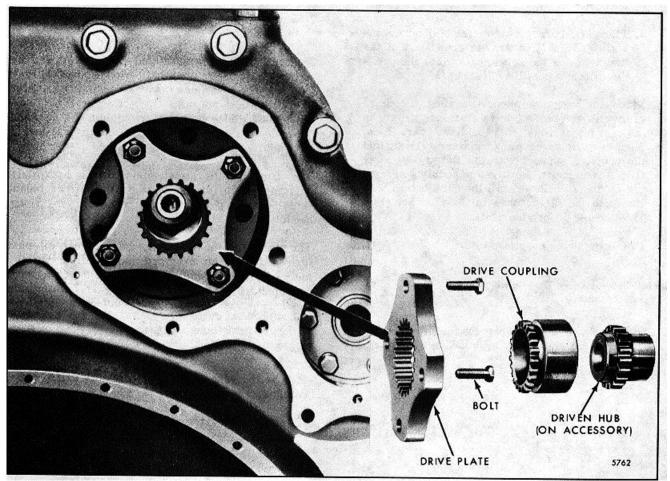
Typical Components of Accessory Drive For Direct-Driven Accessories
